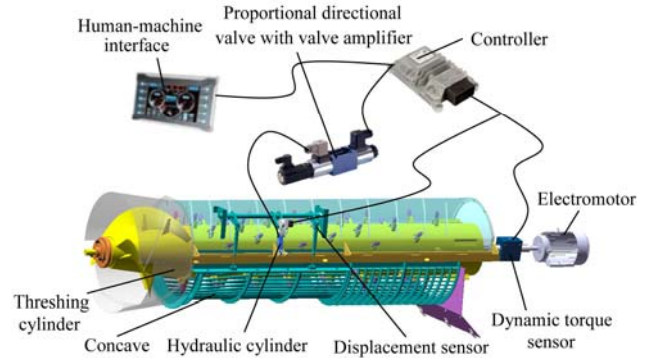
Components of the threshing unit equipped with the electric-hydraulic concave clearance control system
